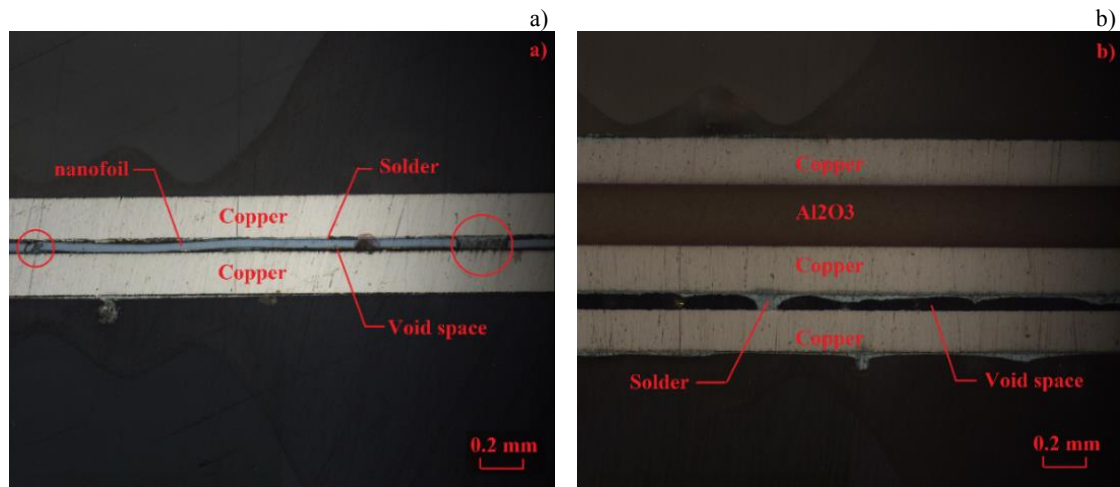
The microscopy image of the cross-section of Sample 2: a) Copper shim to copper shim nanobond joint and b) DBC Al_2O_3 to copper shim soldering (240°C melting solder) joint.
